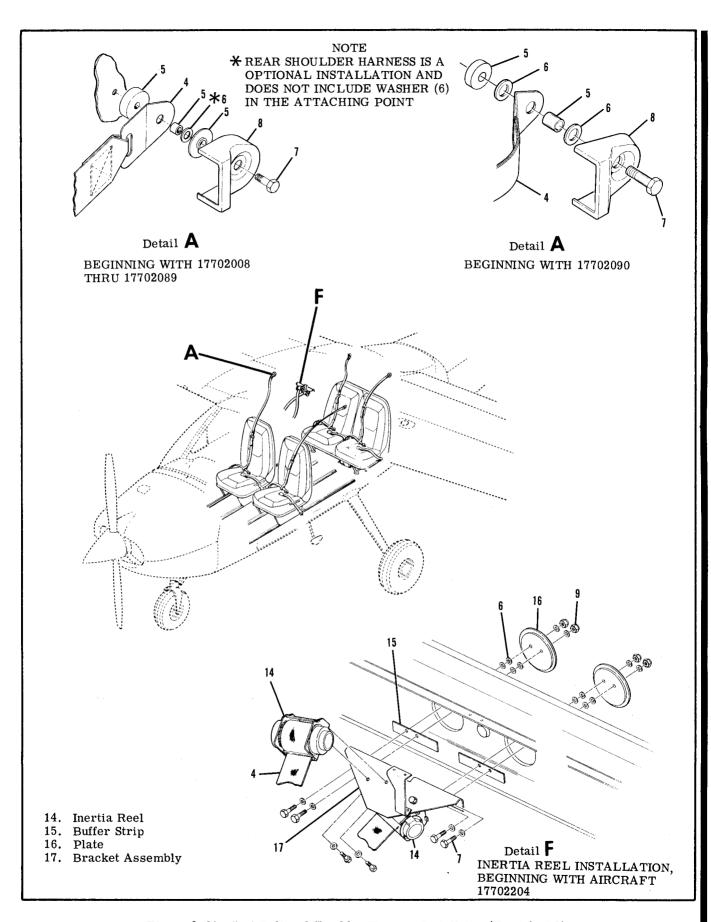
A. Seat Belt and Shoulder Harness Installation(Sheet 2 of 2)
